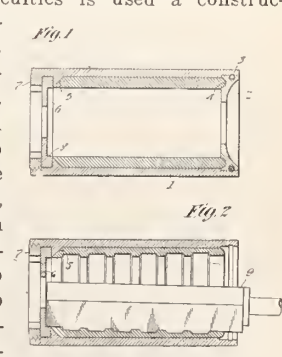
is a longitudinal sectional view of the complete mold, and Fig. 2 a corresponding view of the same with the end cap removed and showing a record formed in the mold and the reaming tool operating thereon.
